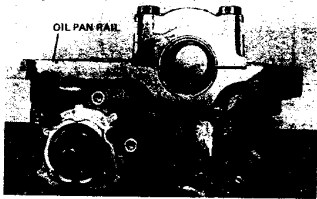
Typical shallow skirt block with the oil pan rail close to the crankshaft centerline. The block pictured here is upside down on a workbench.
